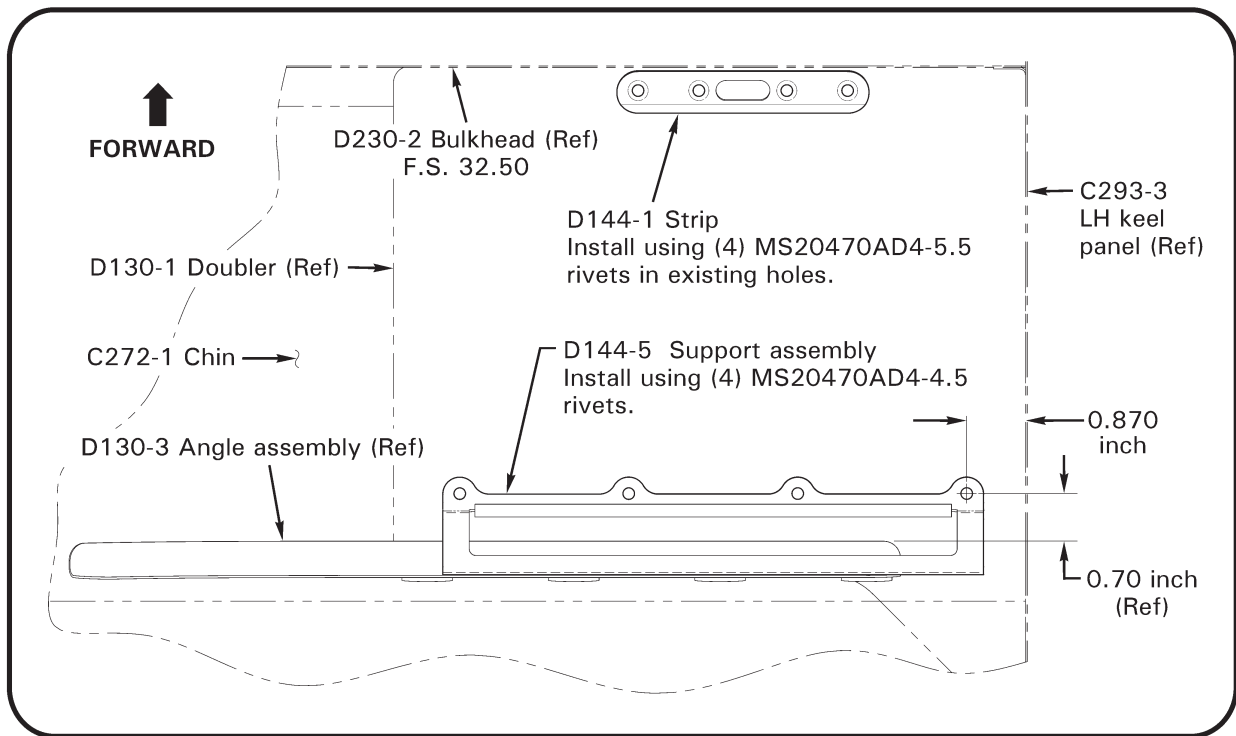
Installation dimensions for D144-1 strip & D144-5 support assembly (view looking down)
